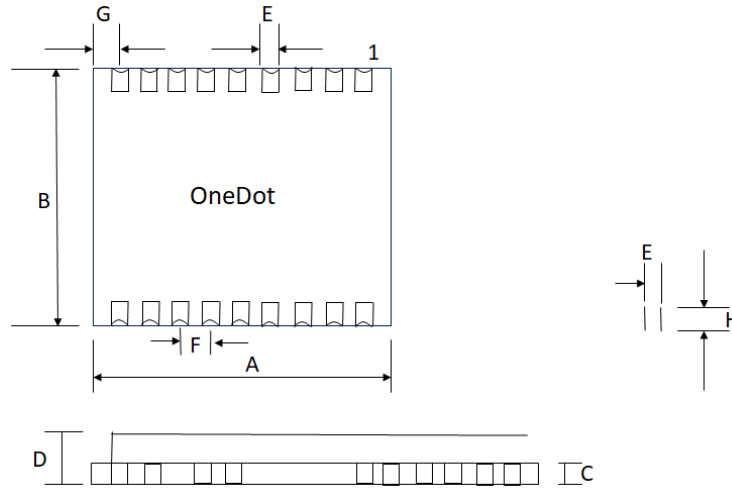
Module Package Dimensions (All dimensions in mm)
